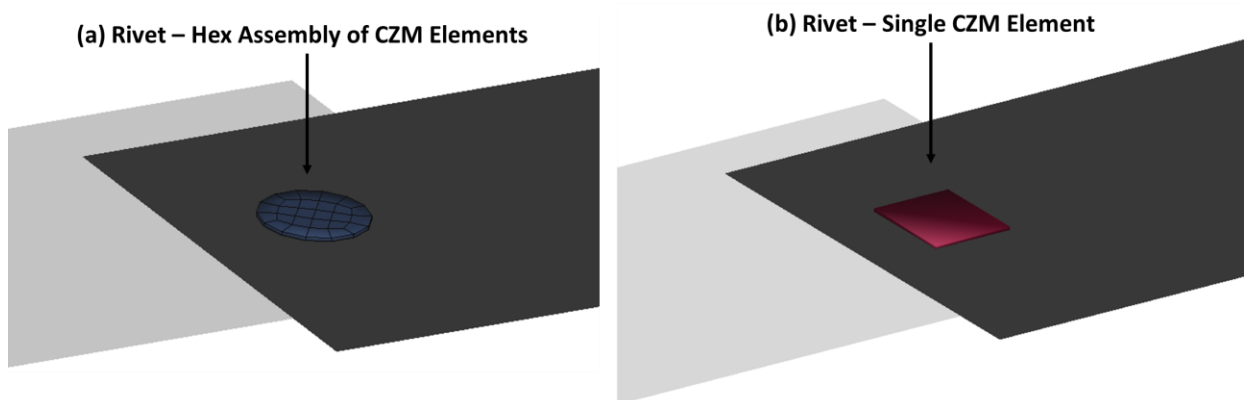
The SLJ model using SPR rivet modeled with a single CZM element (a) and a CZM hex assembly (b).
